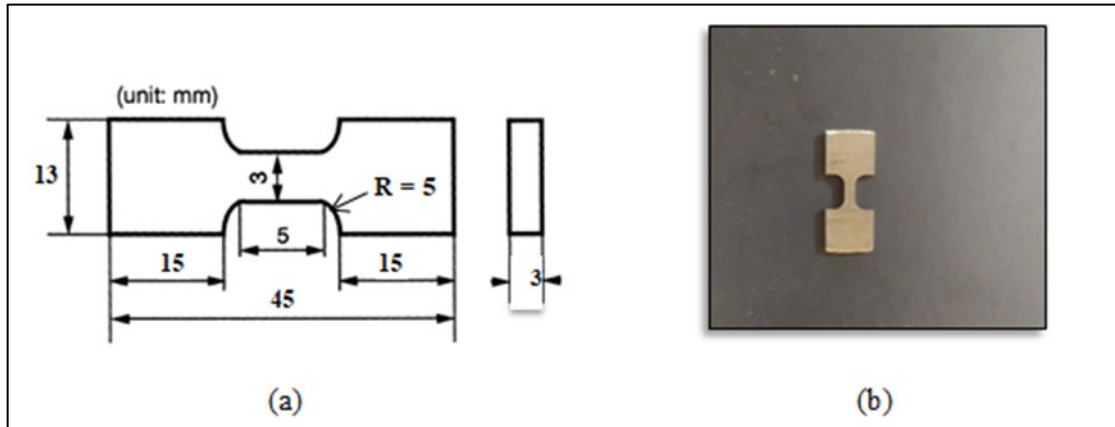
Appearance specimen; (a) tensile test sample dimensions in millimeters (mm); and (b) actual tensile test sample [33]
